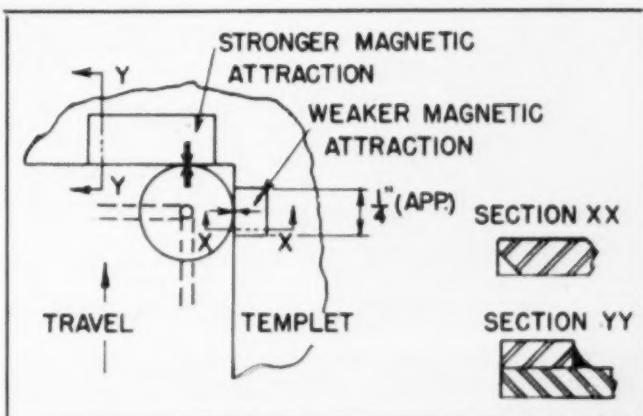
Illustration showing proper method of constructing inside corners of templets.
